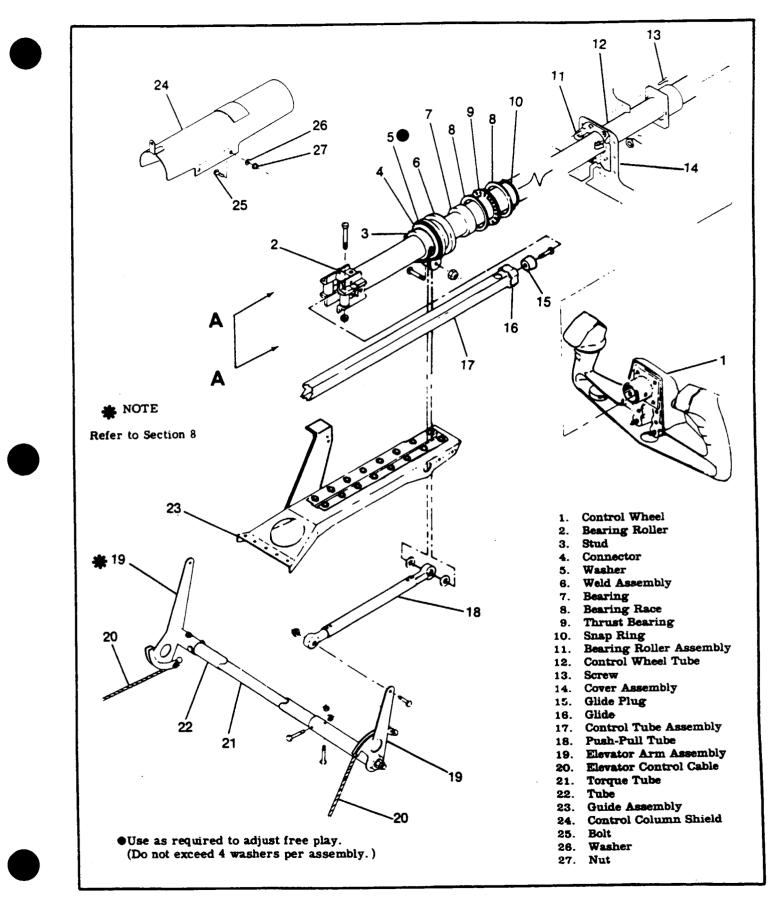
Control Column Installation (Sheet 1 of 3)
